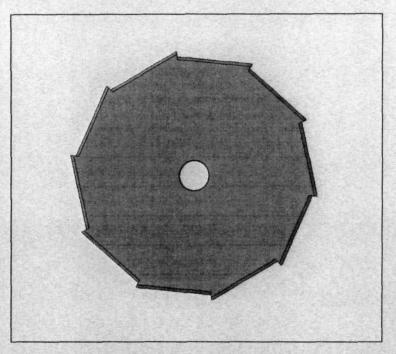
Top view of the slicing blade. The blade rotates counter – clockwise
